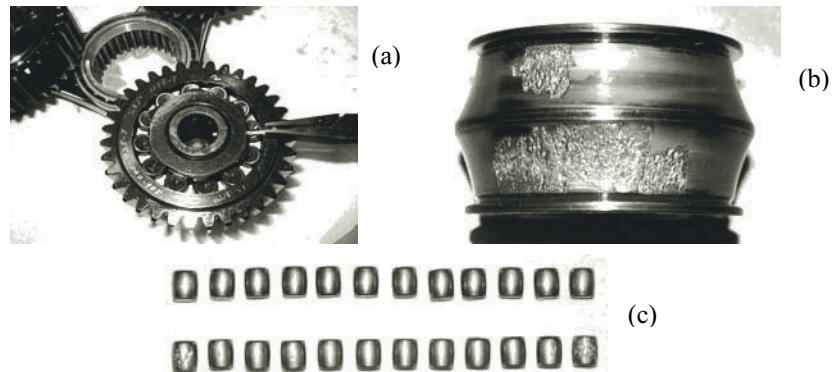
(a) Defective bearing, (b) Spalled inner race (c) Defective rollers
